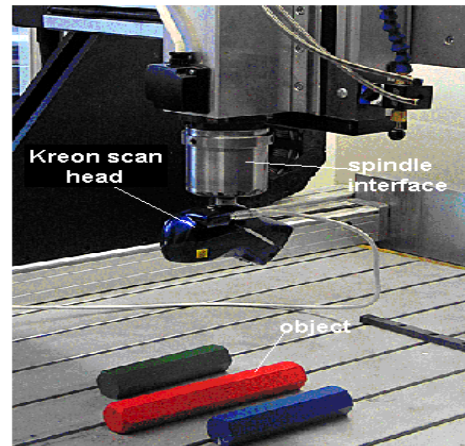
3D non-contact measurement structure, adapted to 3 axis milling machine
